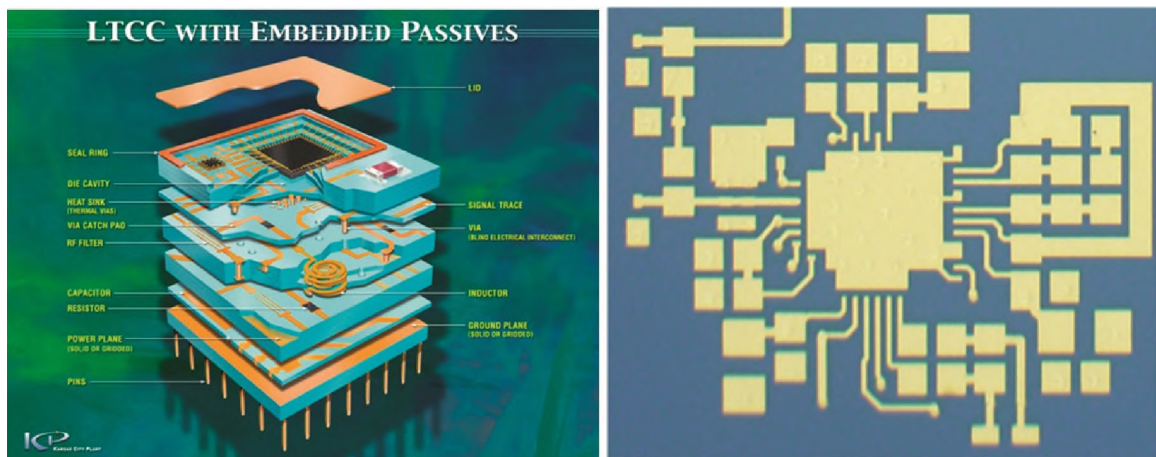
(Left) Exploded view of an MCM-C with surface mount and embedded passive components. (Right) Thin film pattern definition on LTCC.
